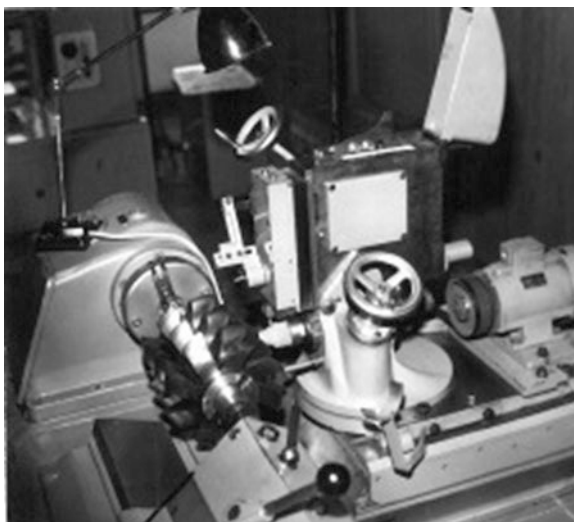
Hob inspection on the device PWF 250—Klingelnberg
